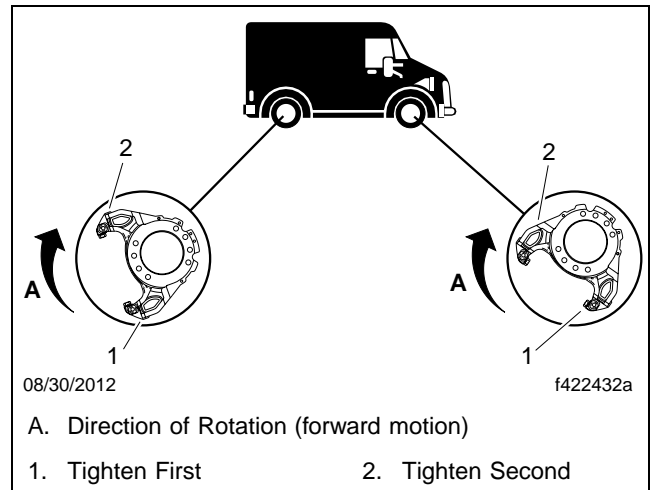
, Tightening Sequence for Caliper Mounting Bolts, Left Side (MCL chassis)
